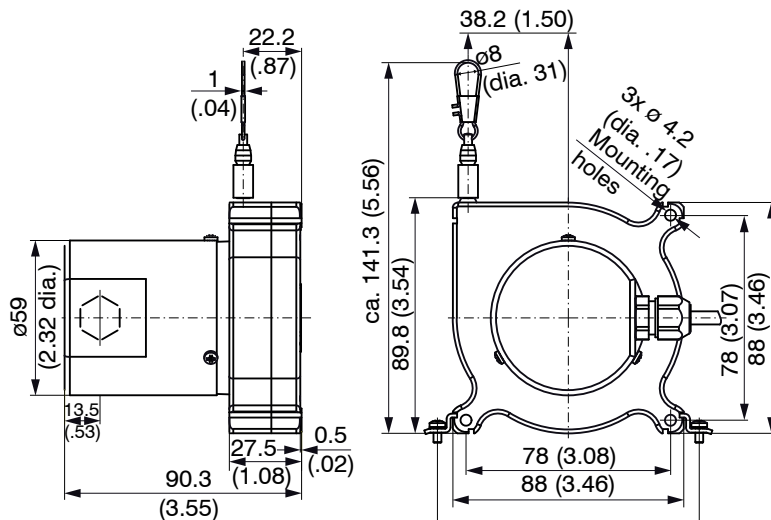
Dimensional drawing WPS- ... -MK88-CR, with potentiometer, dimensions in mm, not to scale
